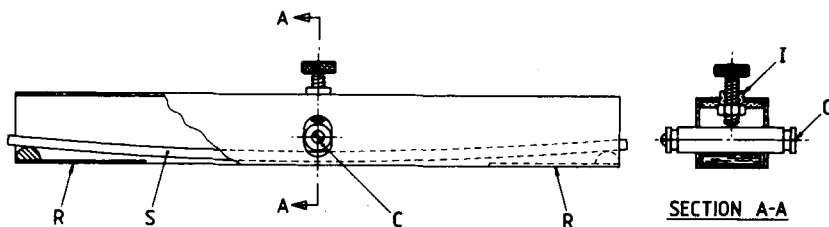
Deforming unit: (S) specimen under flexure; (C) loading cylinder; (I) insulating grommet; (R) reference surfaces.
